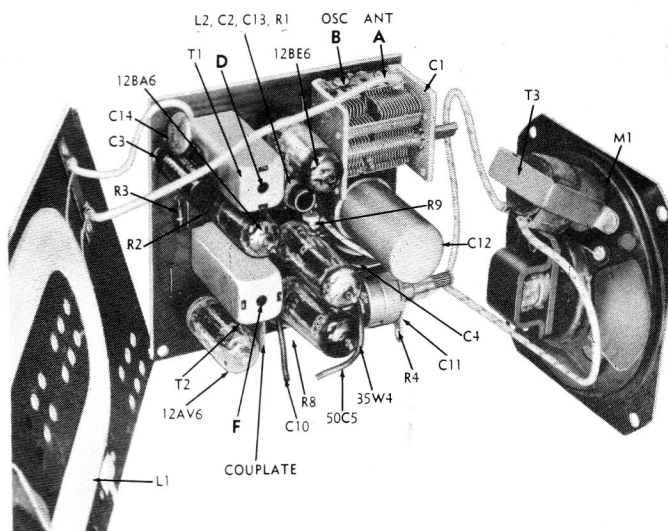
Top View of Chassis. Location of components and alignment points shown.
